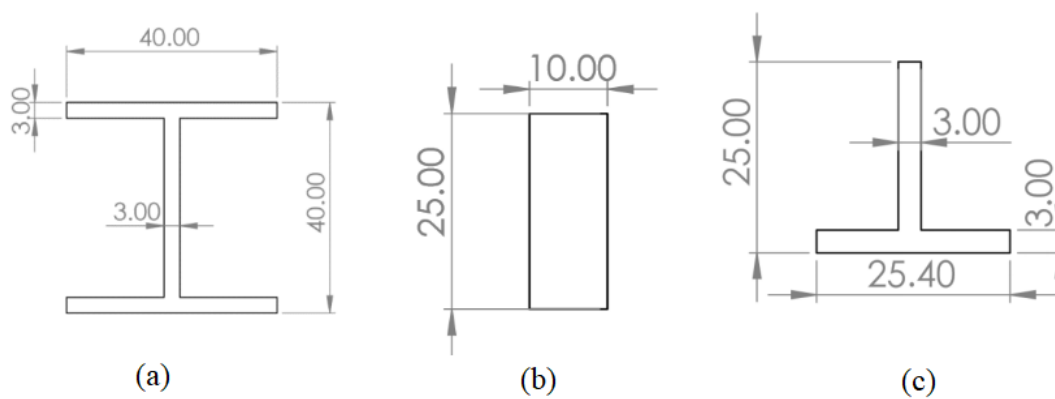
The cross-section of (a) I beam, (b) Rectangular beam, and (c) T beam (the dimensions are given in mm).
